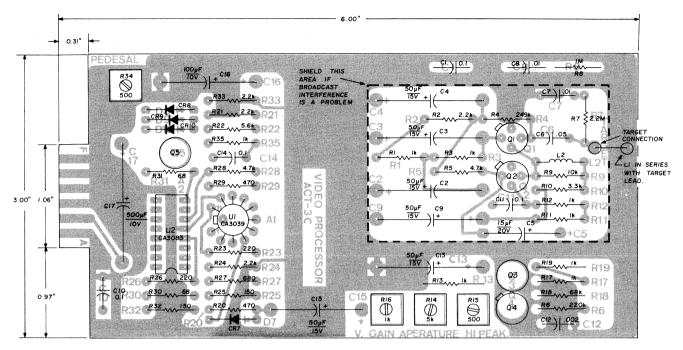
The area enclosed with a dotted line on the video processor board should be shielded if broadcast interference is a problem. L1 is not mounted on the board but runs directly between the board and the Vidicon. All other components are mounted as shown in this diagram.
